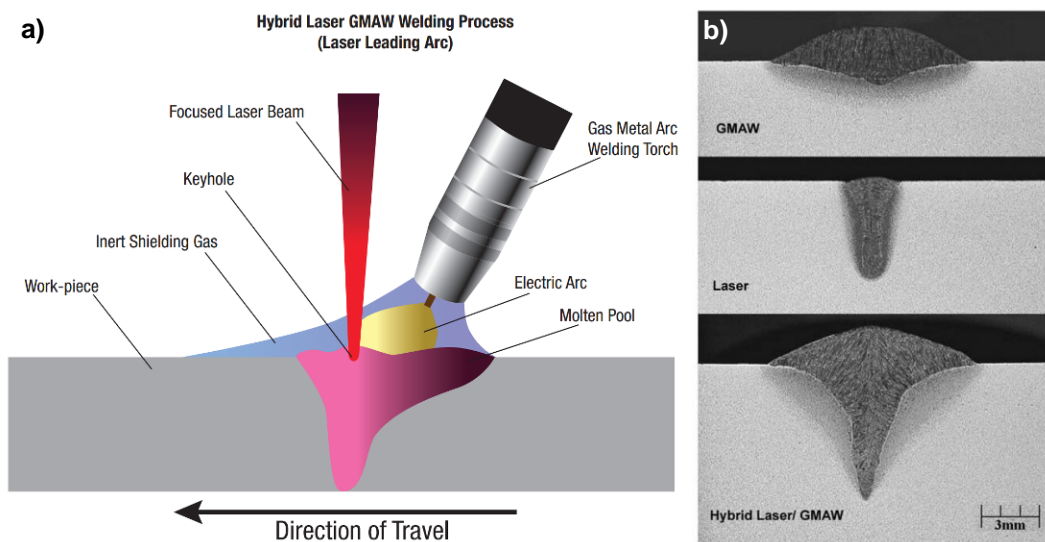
(a) Hybrid Laser Arc Welding Process Schematic [9] (b) Weld cross-sections from Gas Metal Arc Welding, Laser Beam Welding, and Hybrid laser Arc Welding [10]
